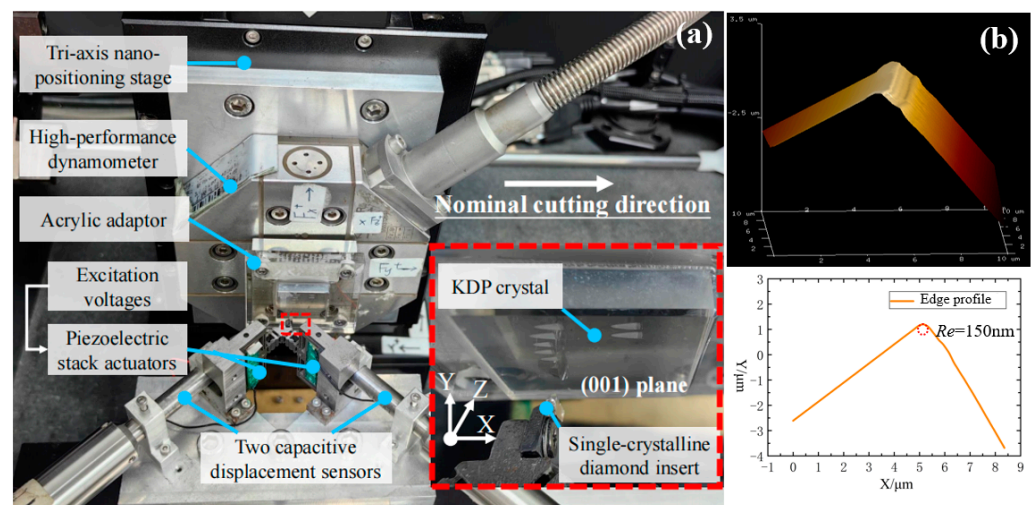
(a) Machining setup of the NMC process; (b) measurement of cutting edge radius.
